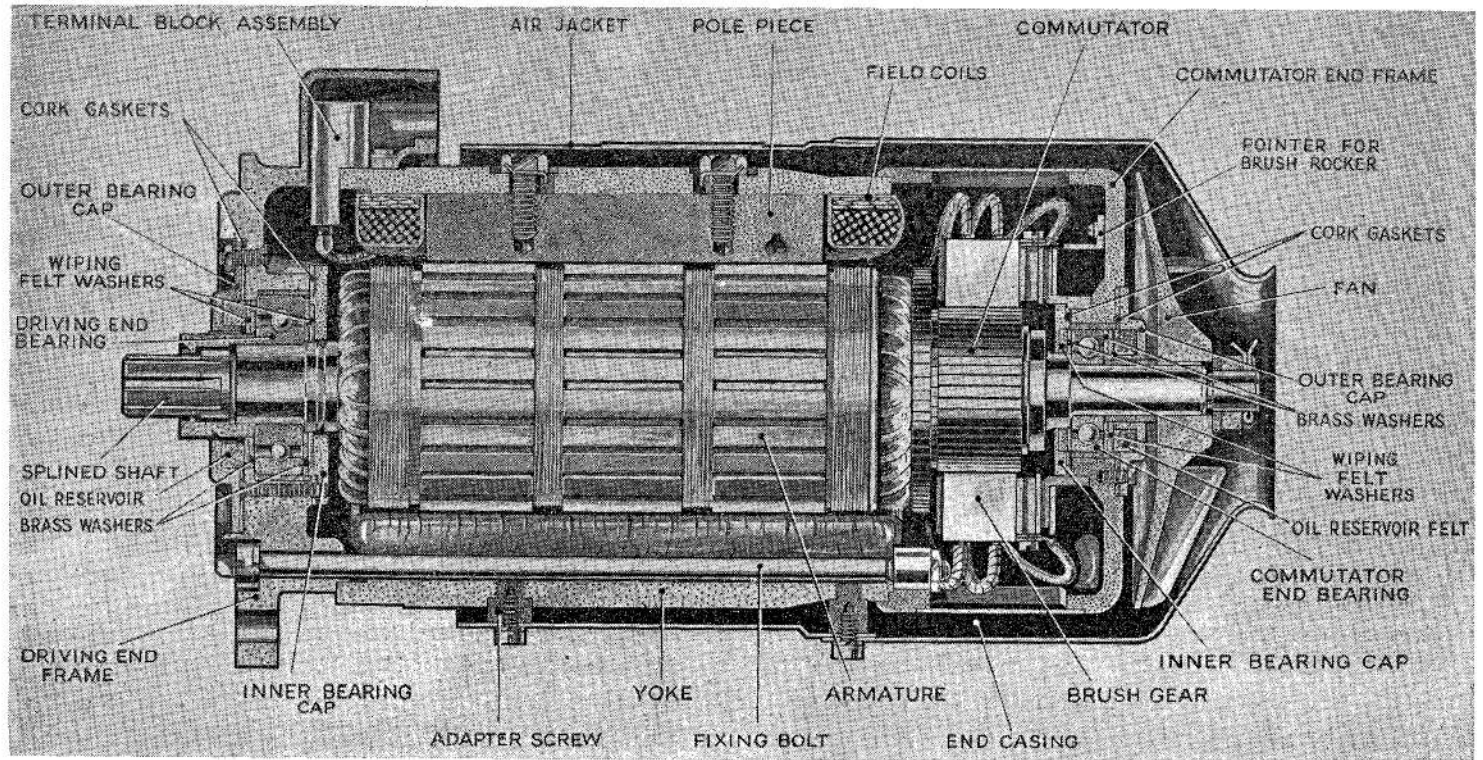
Sectional perspective drawing of the dynamotor, Type D
